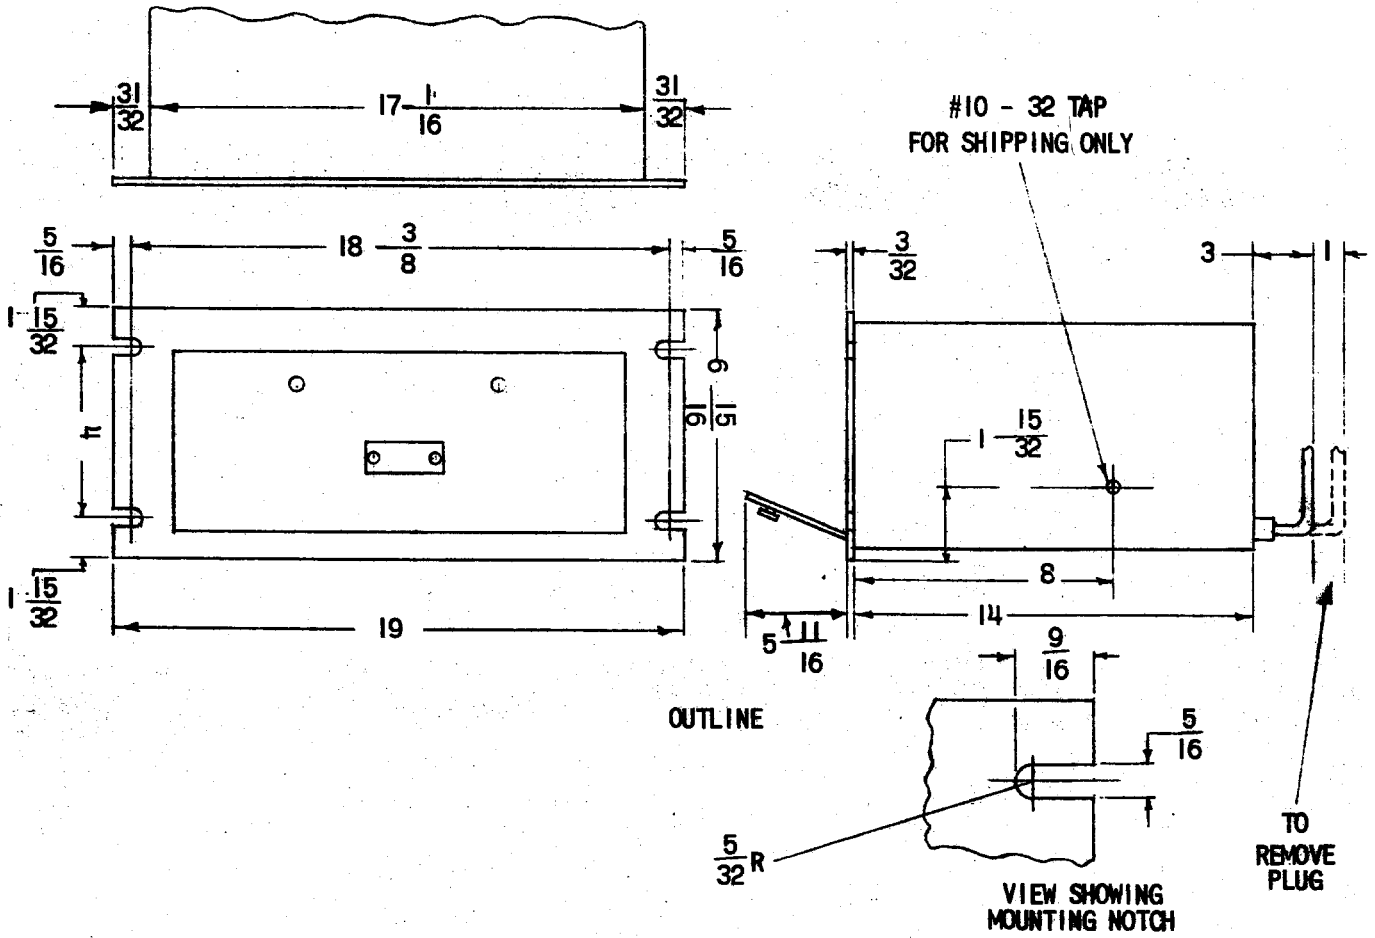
(0227A2037-0) Outline And Mounting Dimensions For The SLA51E Relay
